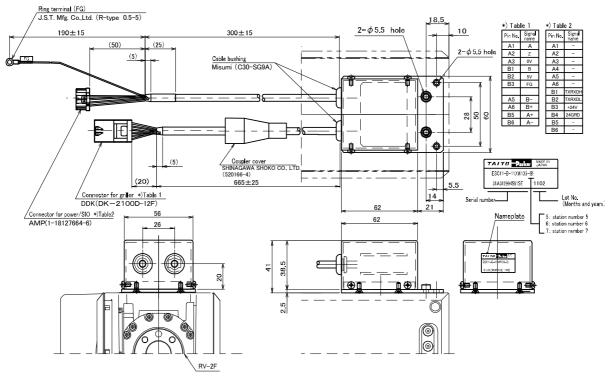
Outline drawing of the control unit (4F-MEHCU-01)
